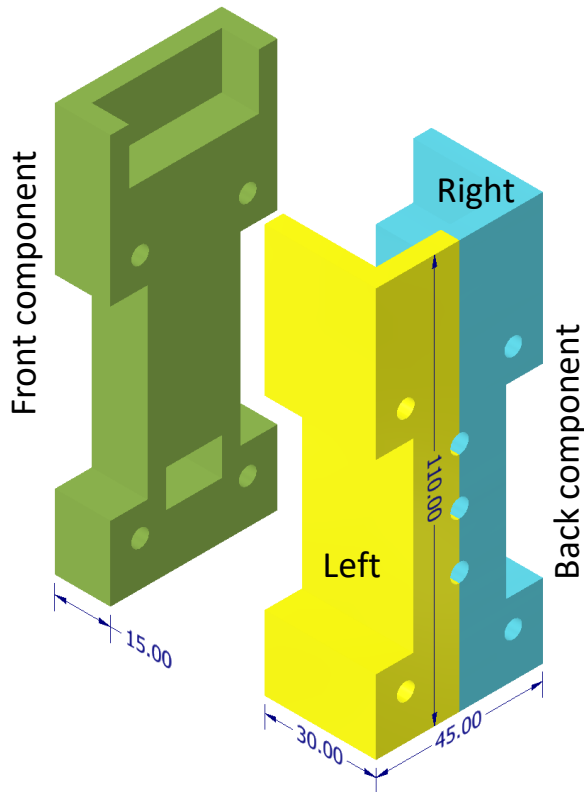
Mold design and specifications. This figure illustrates the design of a 3-part mold used for mold flux analysis. It has a dimension of (110×45×45) mm when combined.
